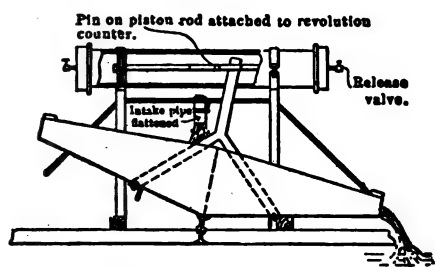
SIDE ELEVATION OF SOLUTION METER.
